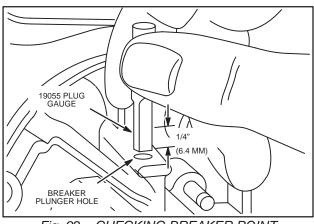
CHECKING BREAKER POINT PLUNGER HOLE
